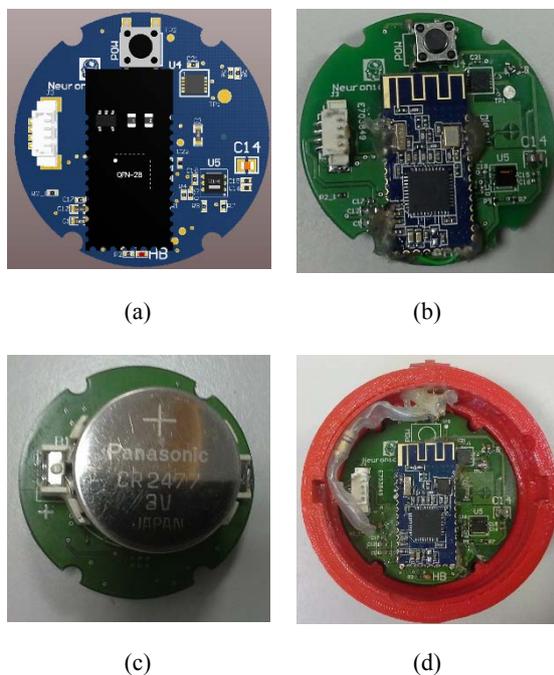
(a) 3D version of the electronic circuit BLE-based temperature and humidity acquisition system; (b) Prototype board: Top view temperature and humidity sensor, microcontroller and BLE module; (c) Bottom view of the device; (d) Top view of prototype board with a CR2477 Panasonic battery inside plastic box.
